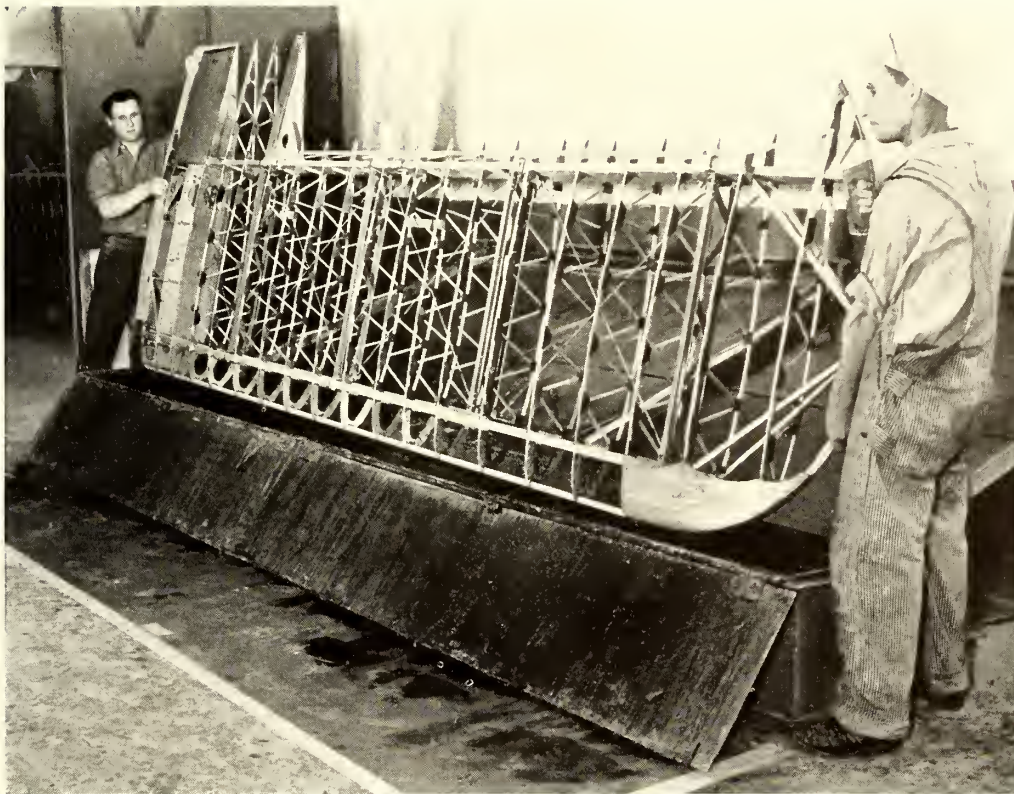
Dipping tank set in floor of finishing room showing method of finishing woodwork of wing section later to be covered with fabric as seen in figure 5-103. Note drain rack in background.
